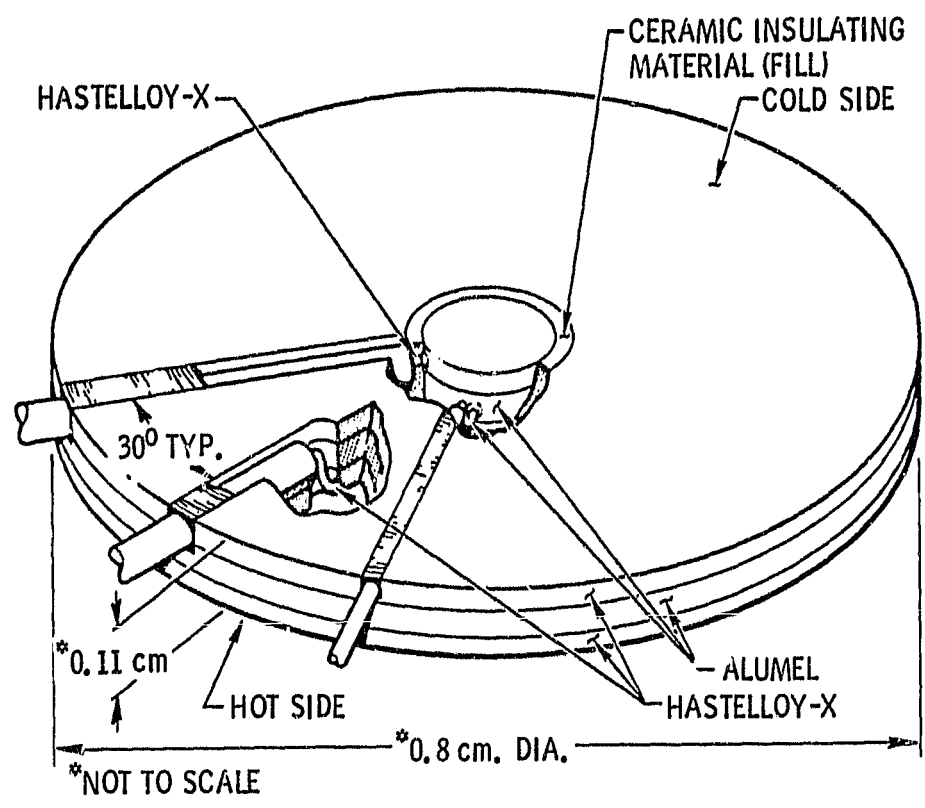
Construction details and electrical schematic of the laminated sensor.
